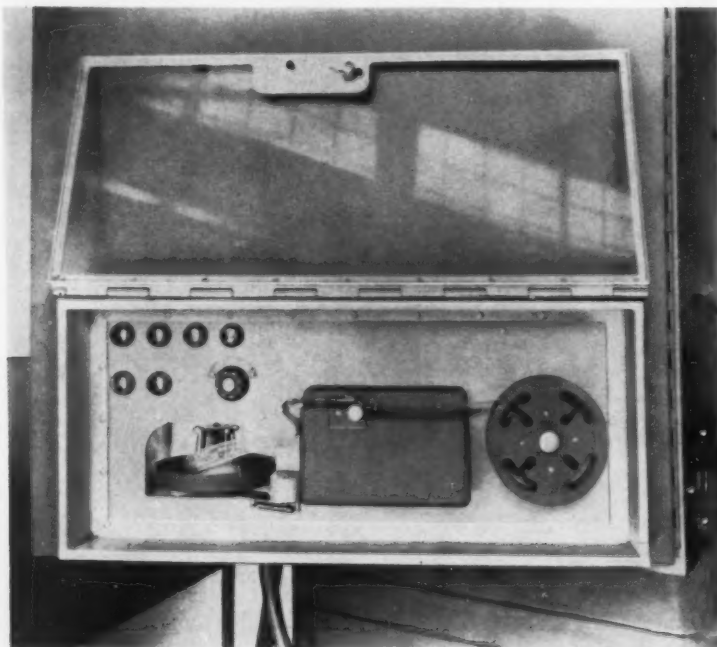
Tape transport cabinet of automatic electronic control system of machine illustrated in Fig. 1
